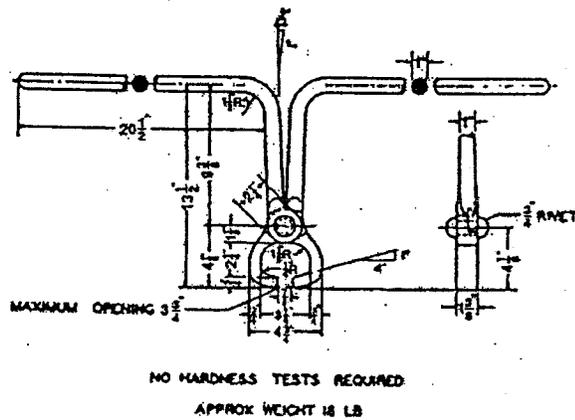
Plan 6-62 - AREMA Rail Tongs
